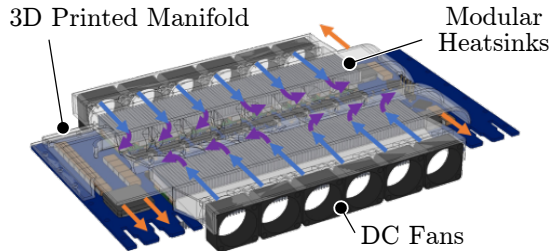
Render illustrating the assembled manifold and forced-air cooling path. Intake air (blue) passes through the modular heat sinks, along the PCB and other components (purple), then exhausts across the inlet and outlet filter passives (orange).
